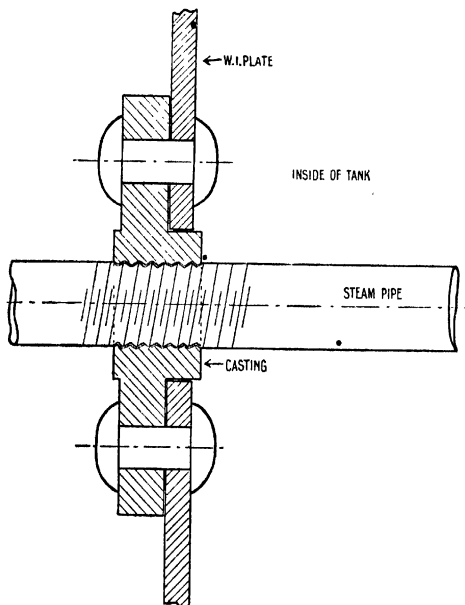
A Method of inserting Steam Pipe into Storage Tanks.
